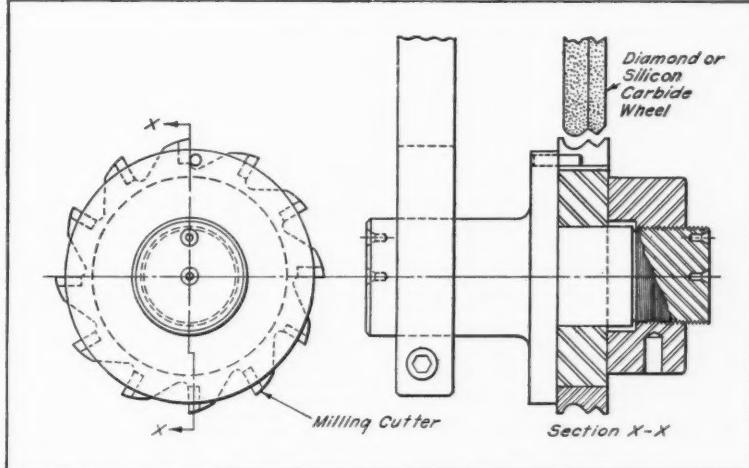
An arbor with two sets of centers is used for concentric and eccentric grinding of formed carbide-faced milling cutters
